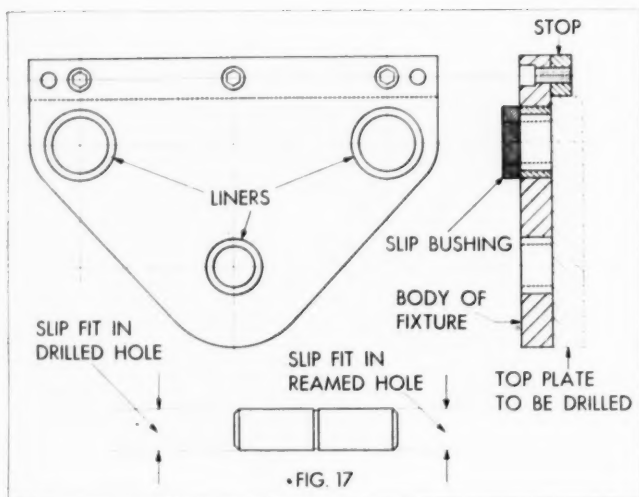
Jig for Drilling Post Holes and Center Indicating Hole in Top-plate Blanks
